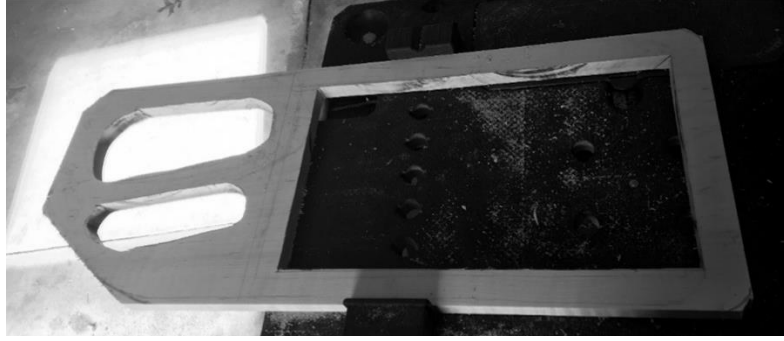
Body of the Jouhikko with Cut Out Hand Holes
